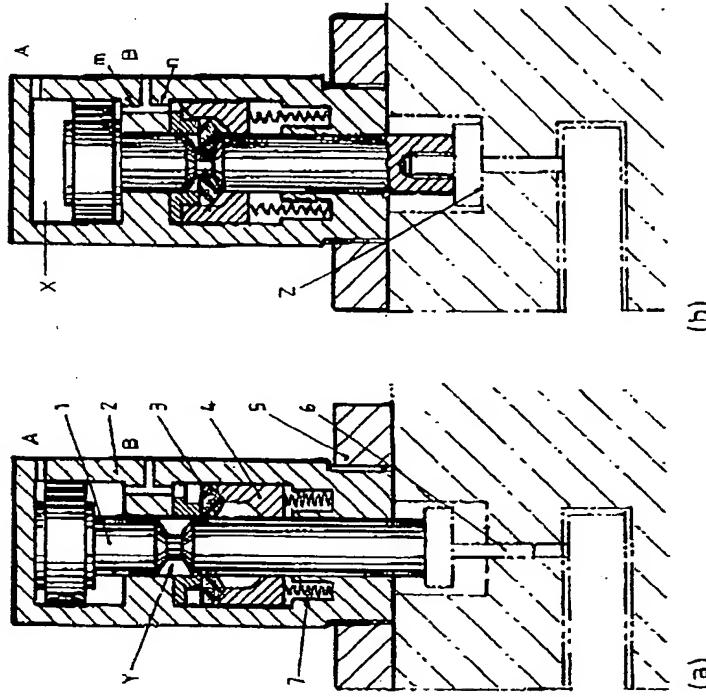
Husco positive locking actuator: (a) side core in withdrawn position; (b) side core in forward position (simplified illustration)
